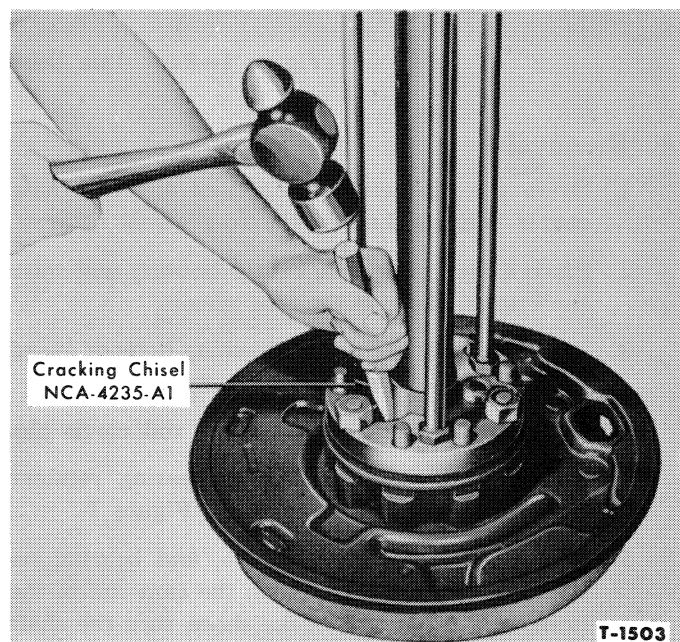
Cracking Chisel in Position to Split Bearing Retaining Collar
